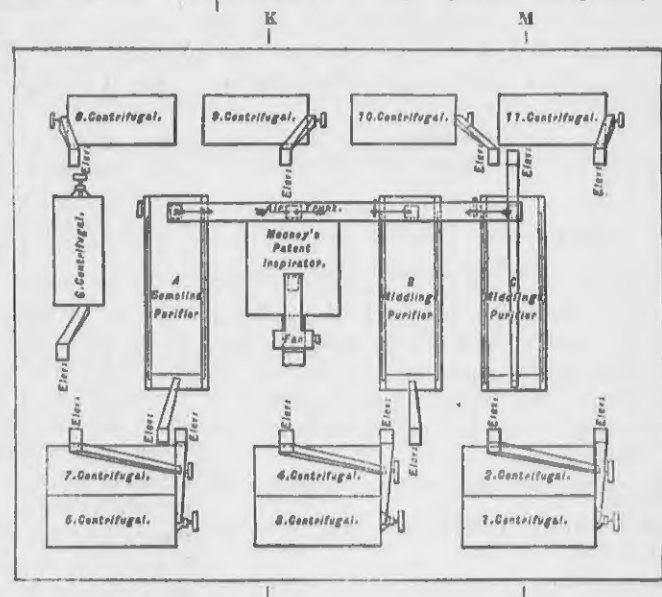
CARTER'S EXHIBITION PLANT.—Plan First Floor.
